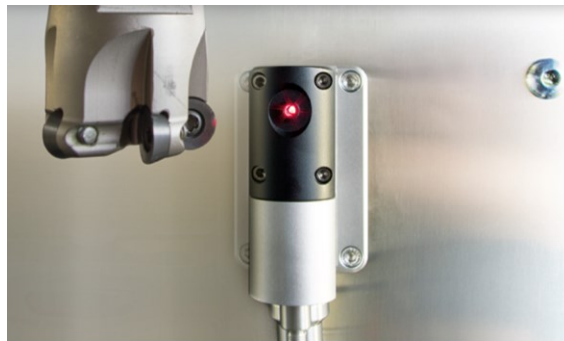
An indexable end mill with round inserts is measured on a laser tool setter.
